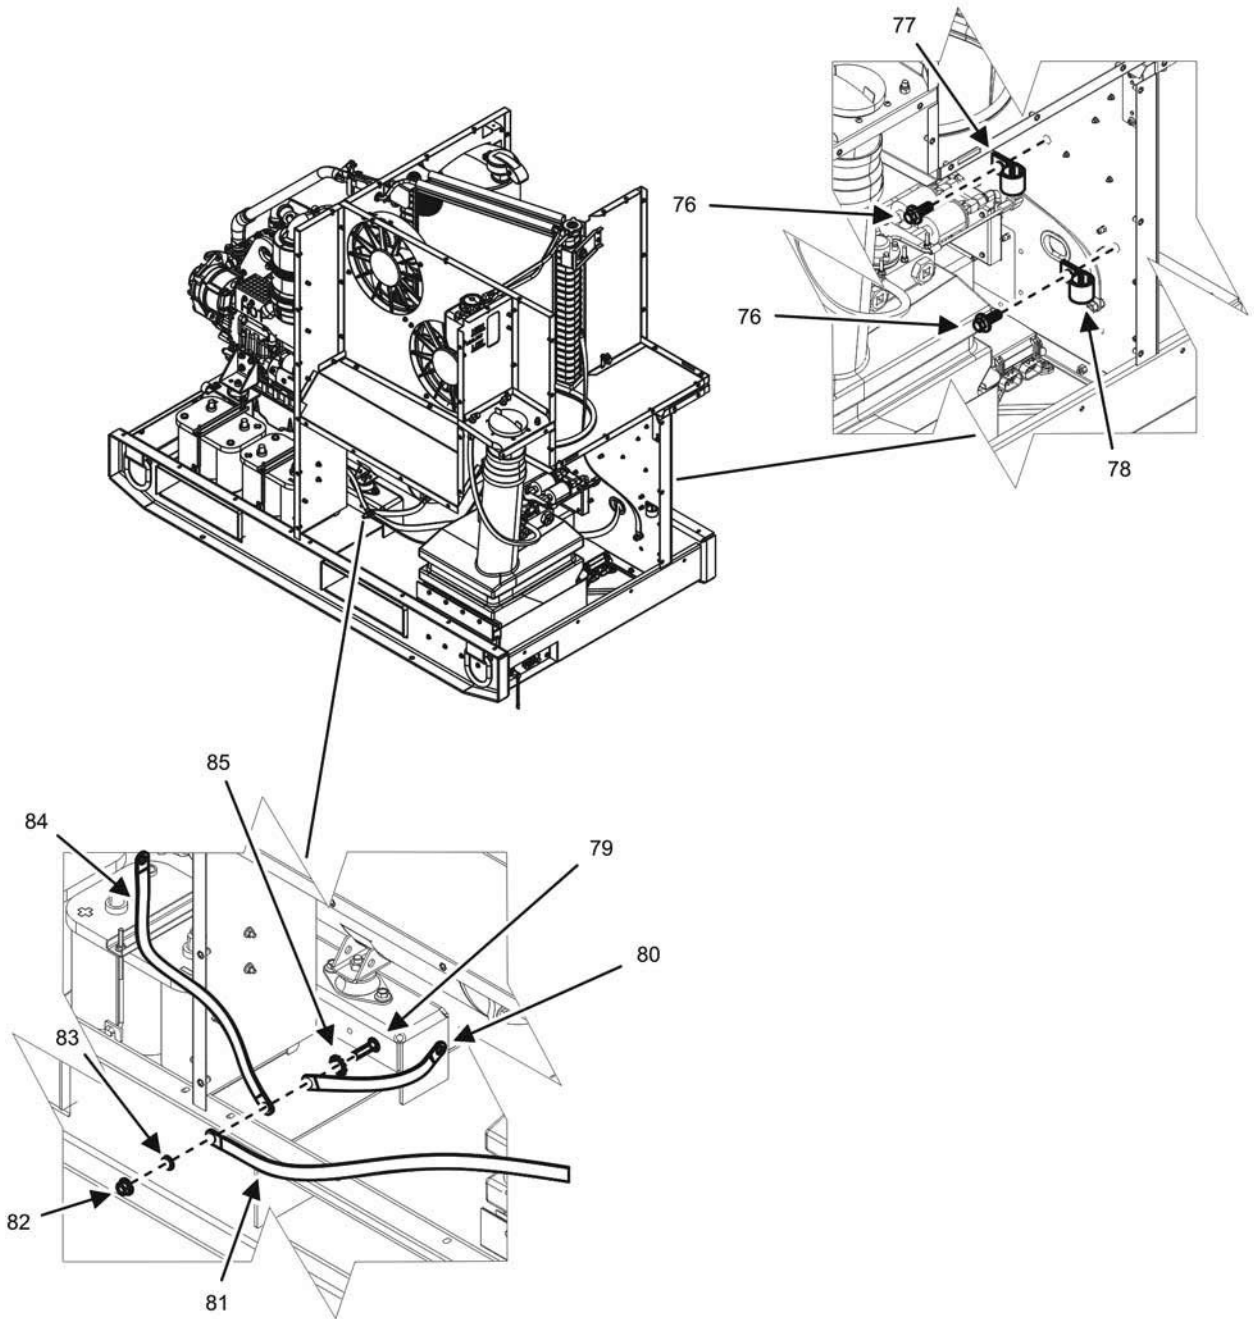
Engine Wiring Harness (Sheet 13 of 14).
